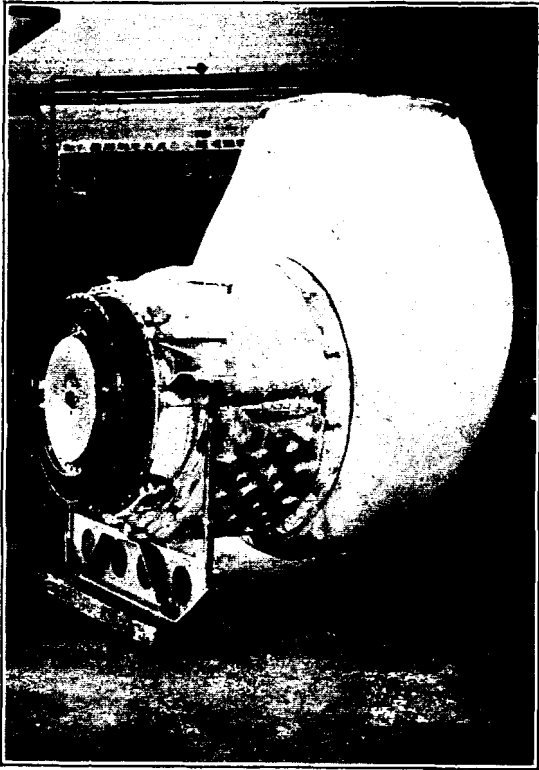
POWER TURBINE CYLINDER AND EXHAUST CASING
